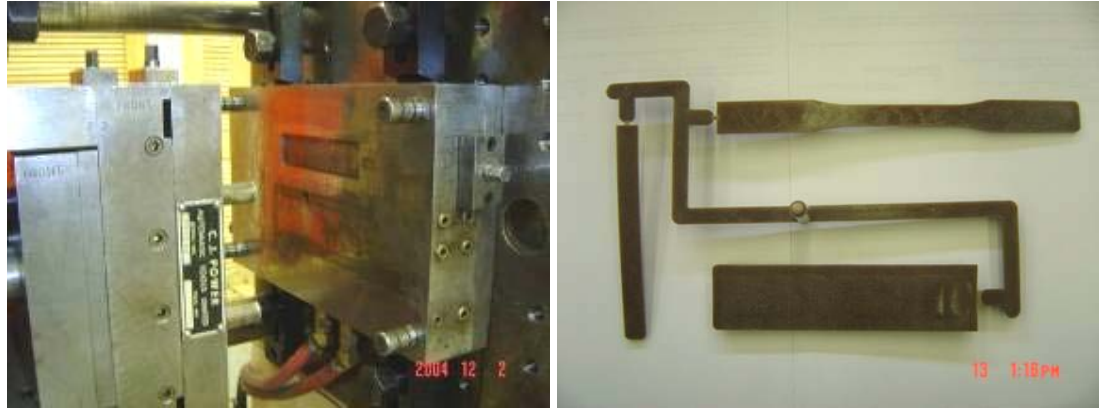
The mold and molded specimens of the injection molding machine at NAIT.
